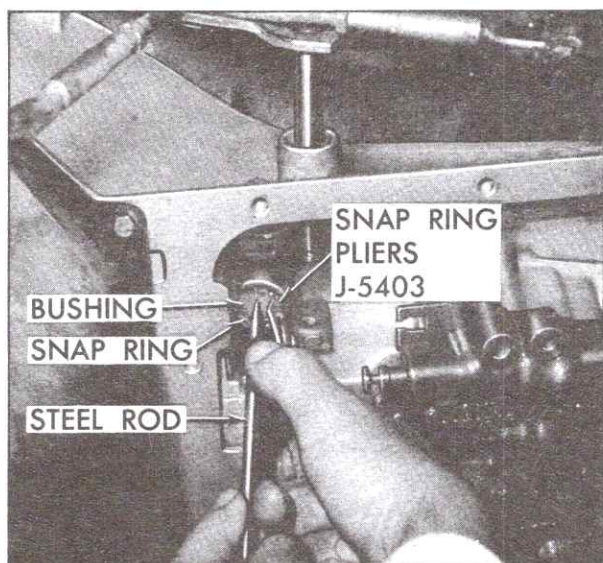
Removing and Installing Pressure Regulator Valve
